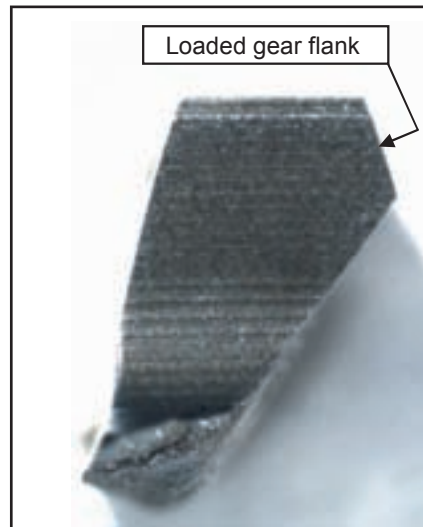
Special tooth breakage on test gear type Eht_{B1} .
